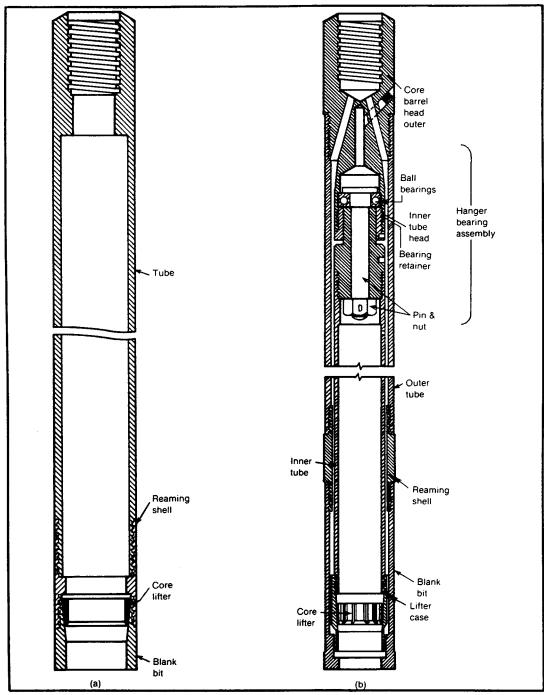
Diagram of Two Types of Core Barrels: (a) Single Tube and (b) Double Tube
